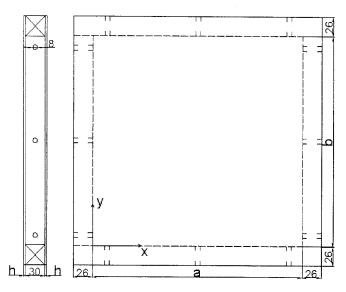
Specimen geometry and assembly setup for test (units are millimeters)
